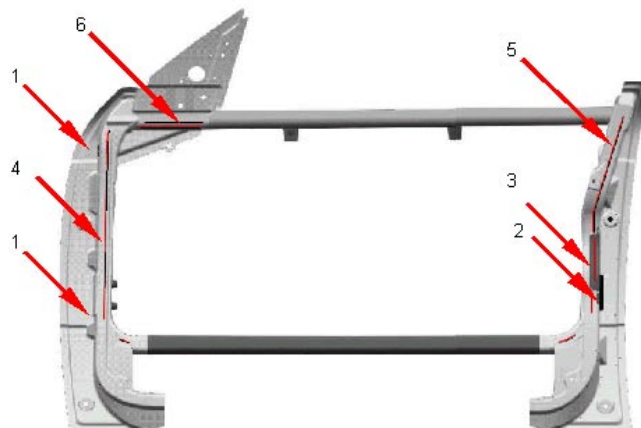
Overview of the several laser weld seams on the ULSAC door
